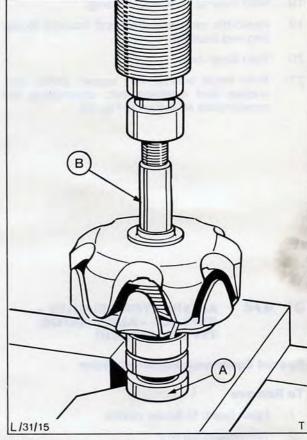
Fitting the slip ring end bearing A - Bearing B - Rotor shaft
